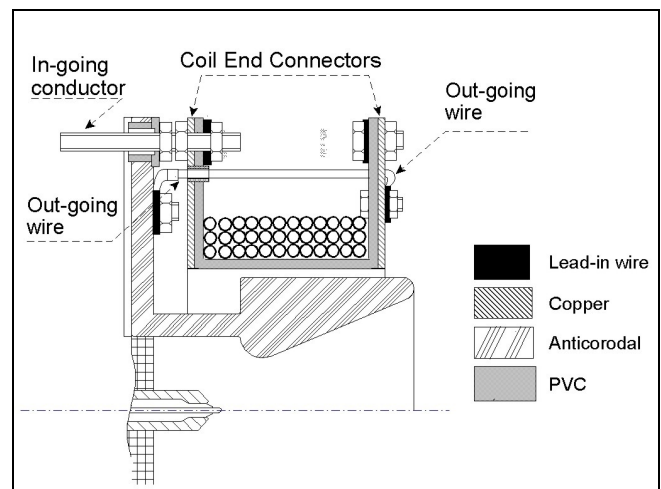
Sketch of a partial view of the long coil mounted on the thruster.
